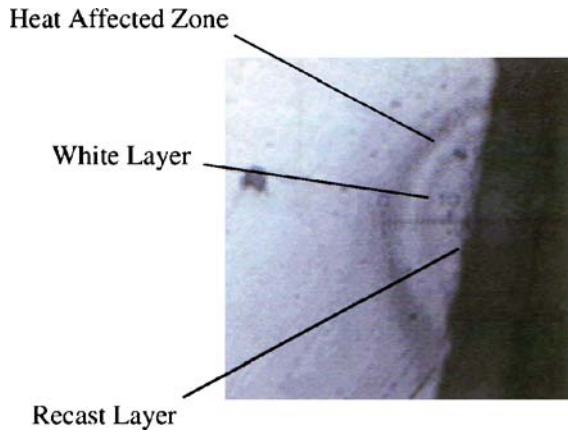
Surface layers of thermal damage in WEDM machining
